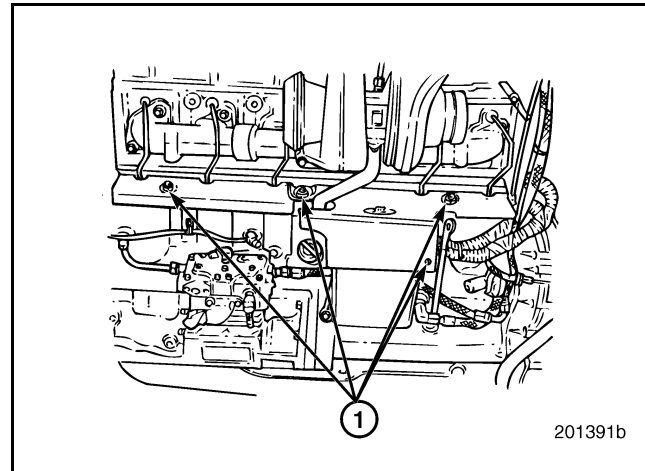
Heat Shields (with Right-Side Mounted ECU)
